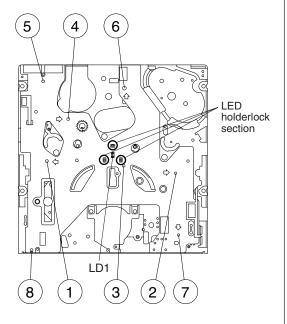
(2) — Mechanism unit bottom side —
